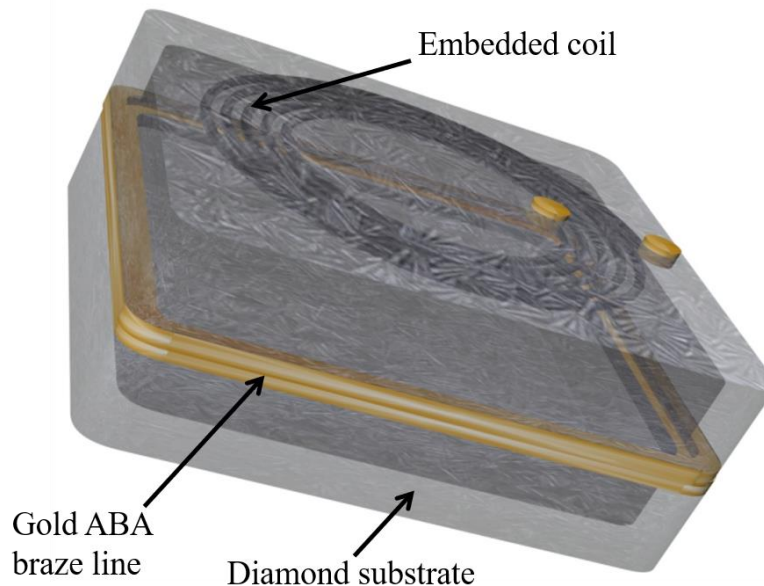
The schematic diagram of an embedded coil in a diamond where the coil is hermetically sealed using laser welding of gold ABA braze lines.
